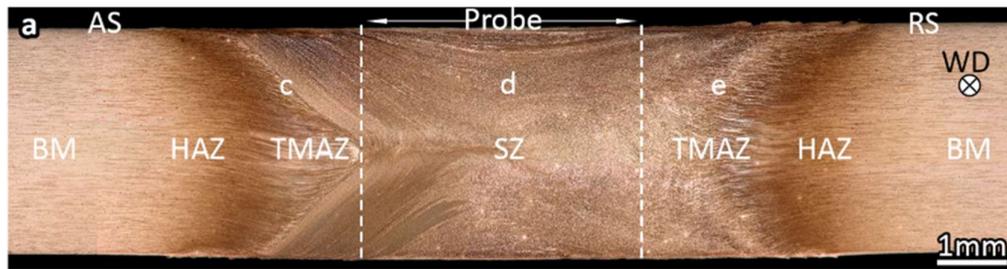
Macrograph of Bobbin friction stir welded joint displaying the hourglass shape (F. F. Wang et al., 2015a).
